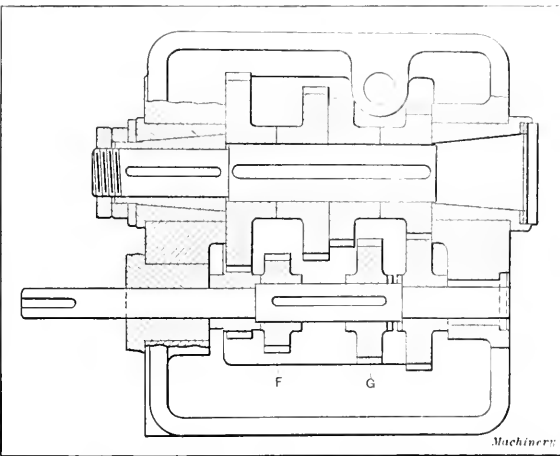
Change Gears for varying the Cutter Spindle Speed
